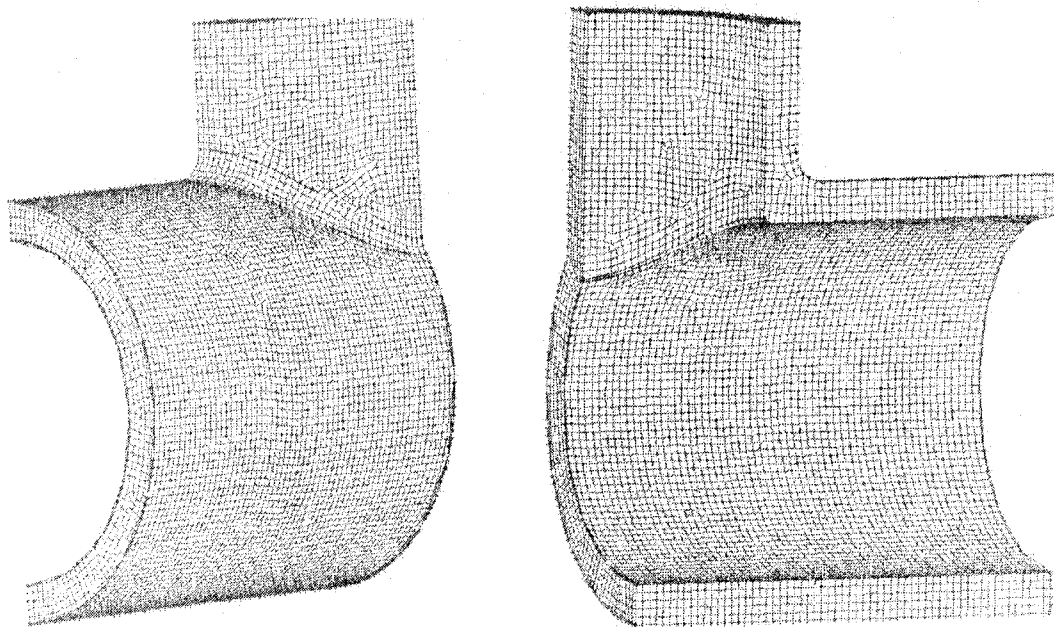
View of the details of the outside fillet weld and the inside rounding at the junction.
